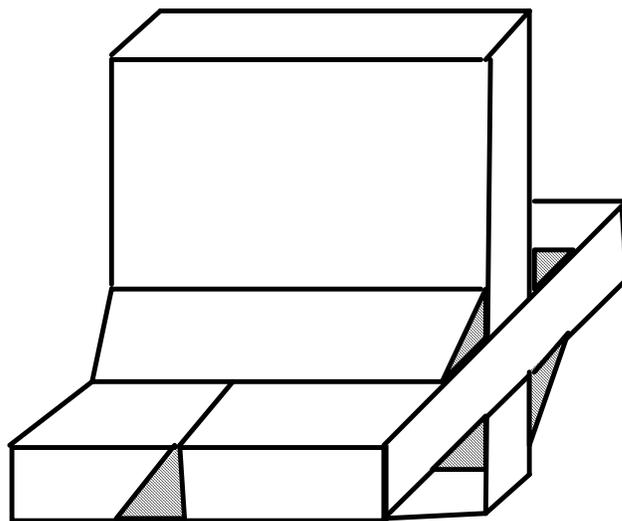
A combined weld is a mixture of fillet and butt welds.
